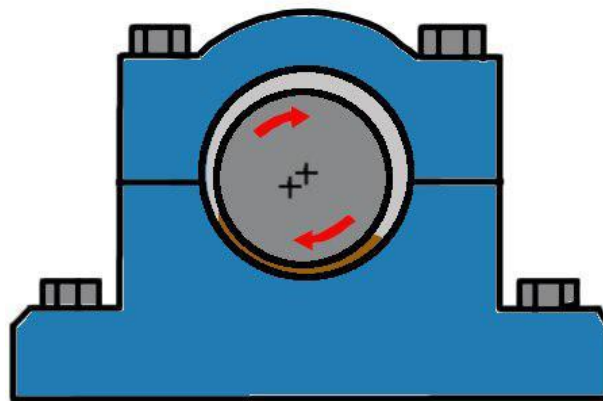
The schematic of a journal bearing inside the bearing chamber
